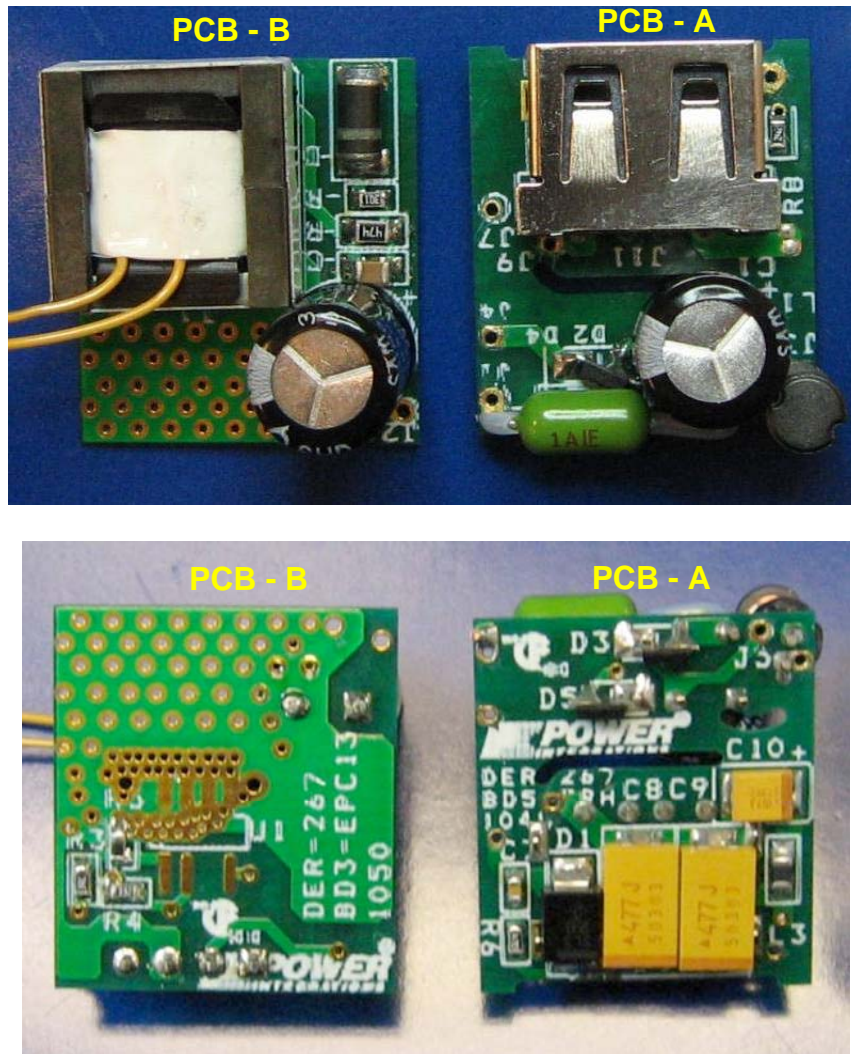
DER-267 Board Photograph (Top and Bottom Views).
